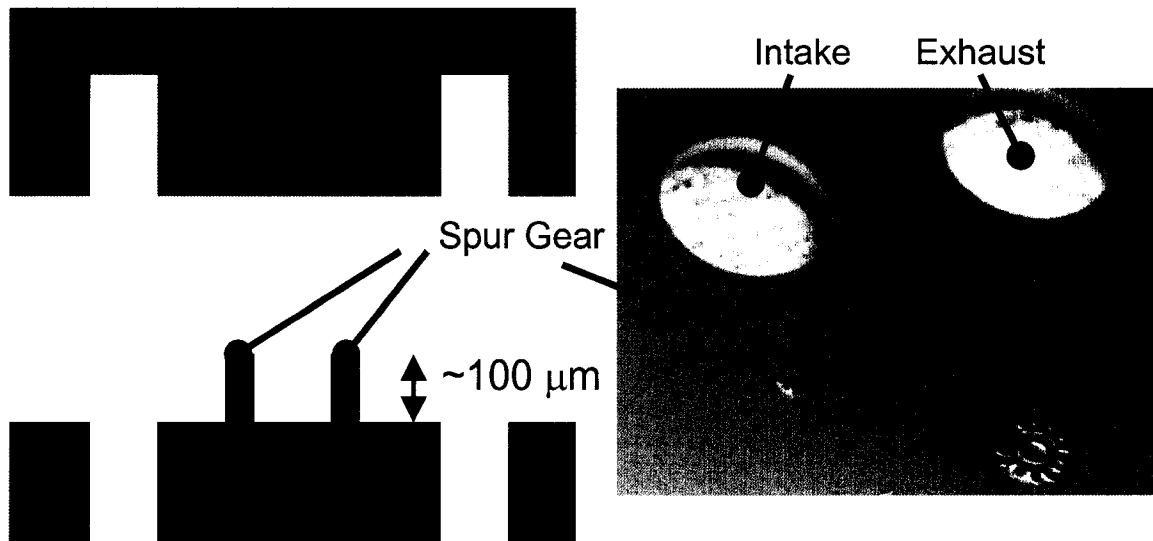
Detailed view at the two step etch process used in fabricating the spur gear plate.
